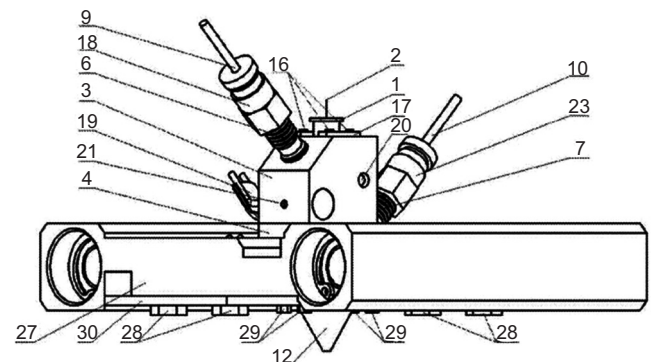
Design layout 2 for a multi-stage wire feeding print head [90].
